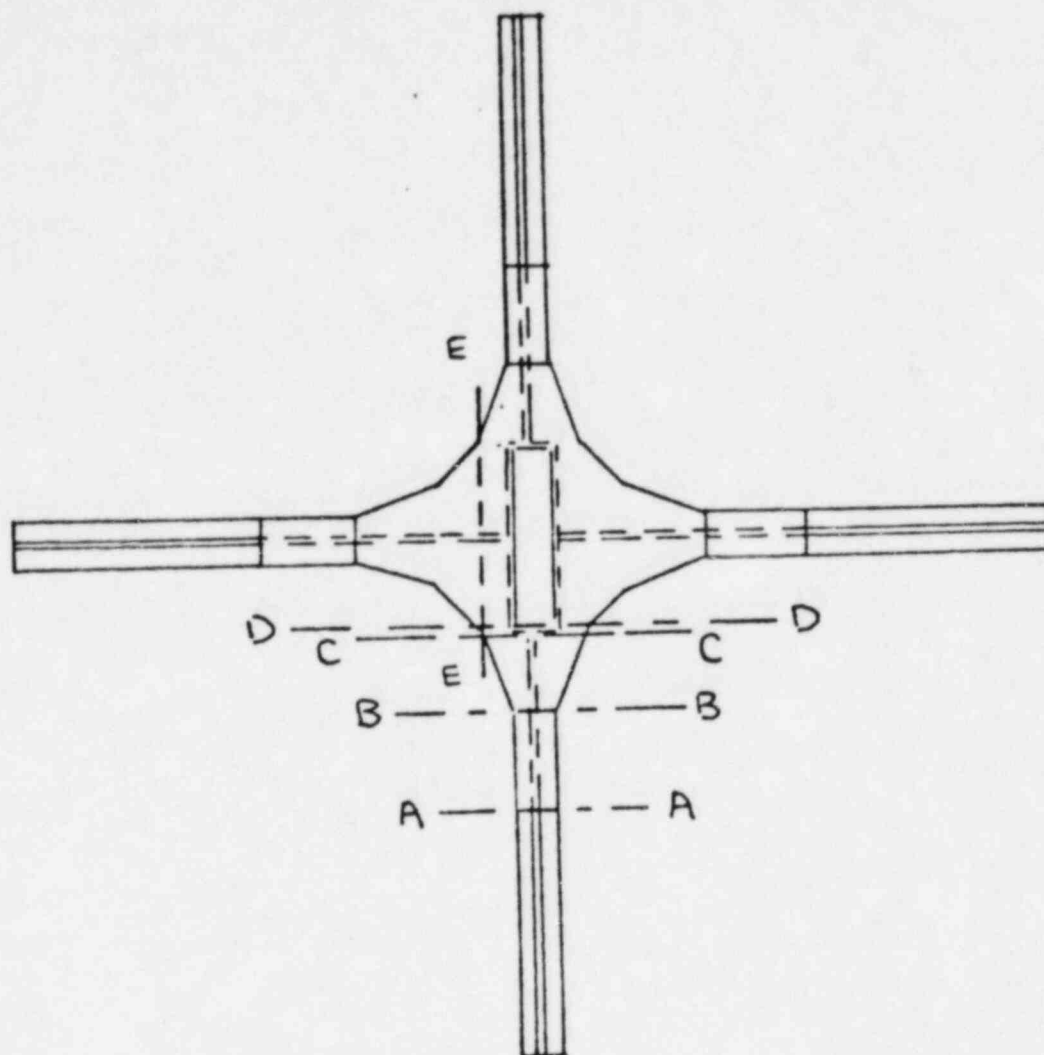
RPV HEAD STRONGBACK SECTION LAYOUT
